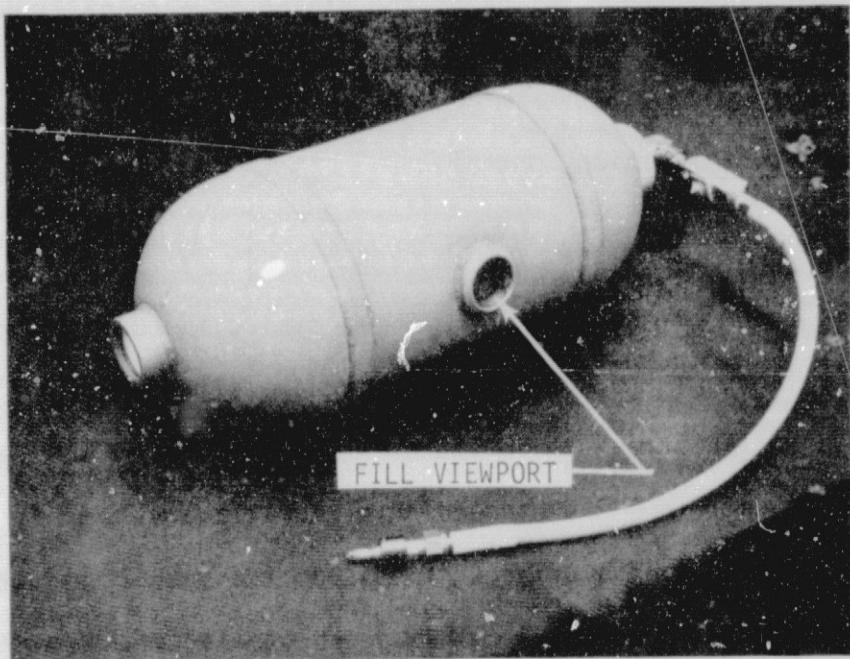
(a). PORTABLE FLUSH WATER TANK ASSEMBLY
